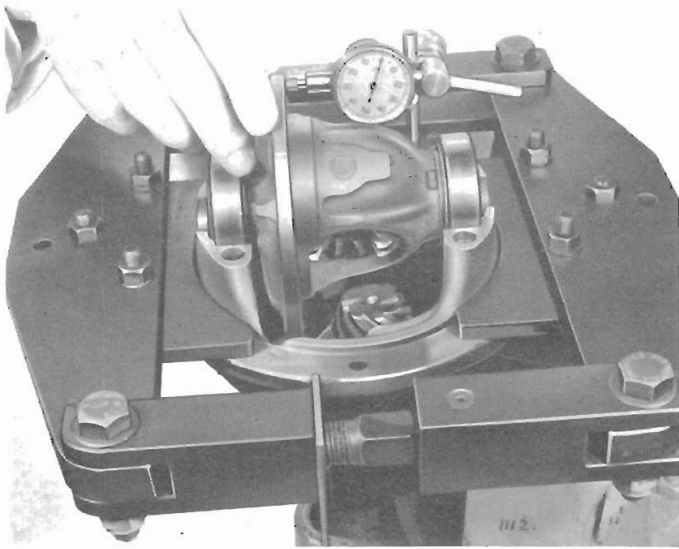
Measuring the crown wheel mounting face of the carrier prior to dismantling
